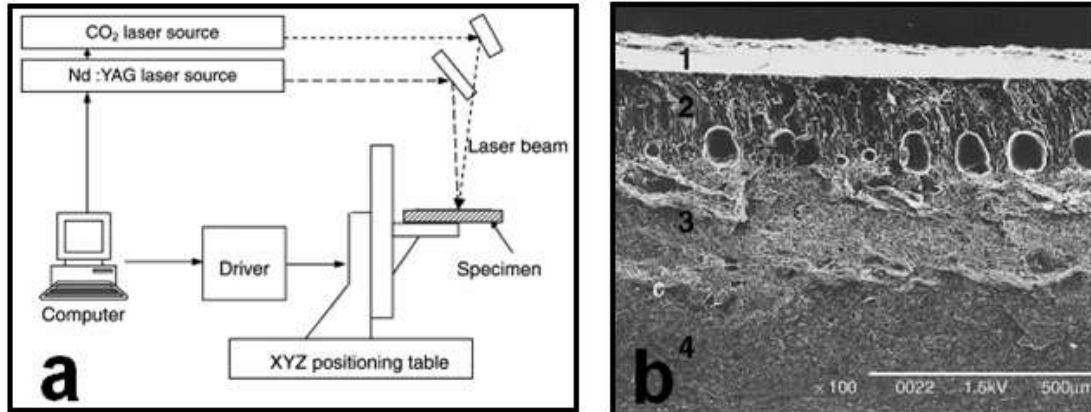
a) Configuration of laser cutting using controlled fracture technique. b) fracture surface of Al<sub>2</sub>O<sub>3</sub> substrate [76].
